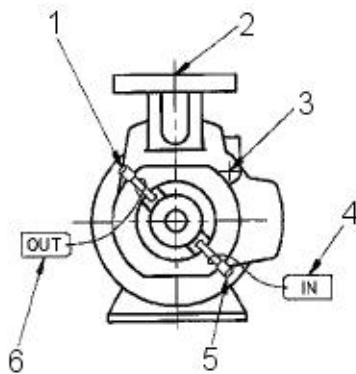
Connection of pipelines/tubes: Mechanical seal, double-acting
